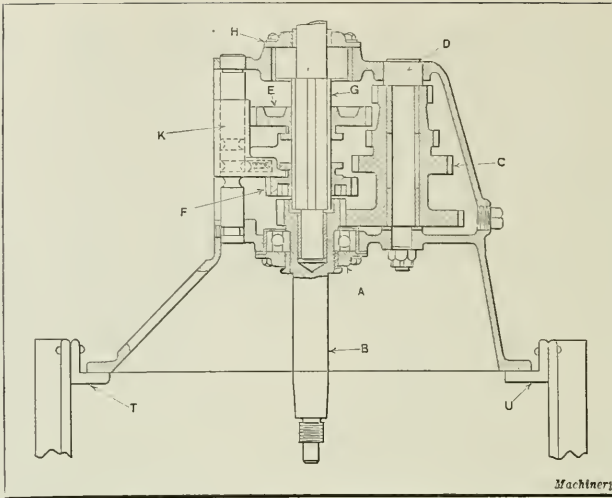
Sectional View of Transmission Case assembled by the Conveyor Method
